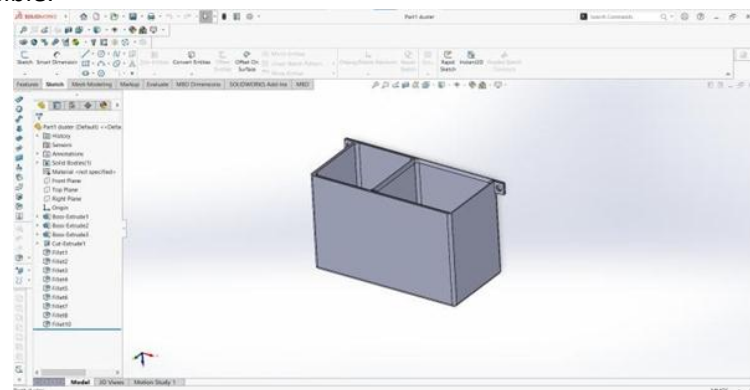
CAD model of the customized chalk piece and duster holder designed using SolidWorks for Fabrication using FDM 3D Printing technology.
